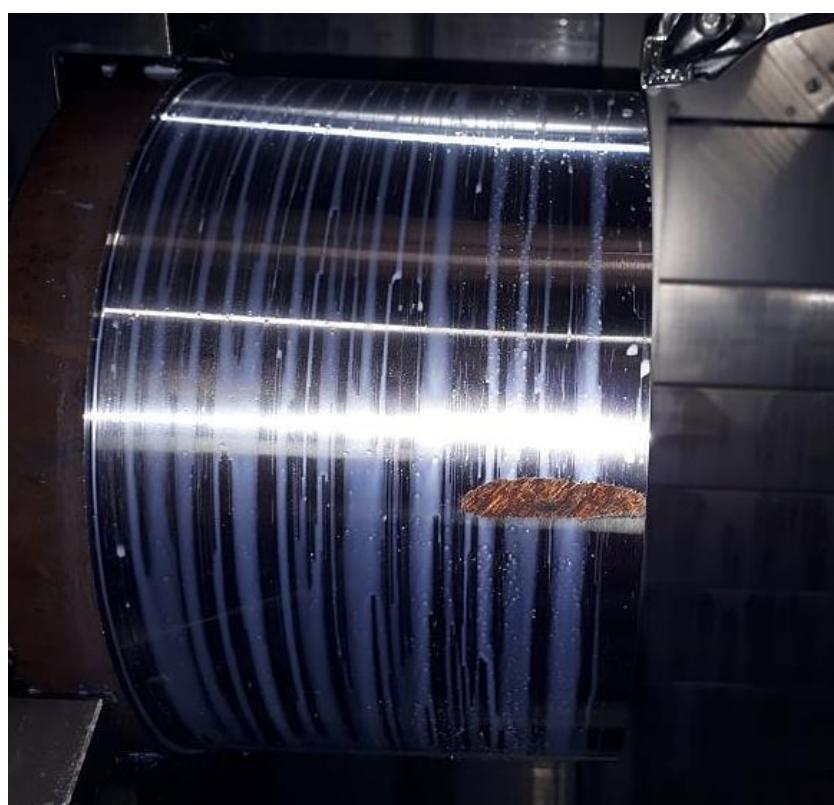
Significant flaw in cylindricity on a workpiece causing shocks during roughing of the external diameter.
